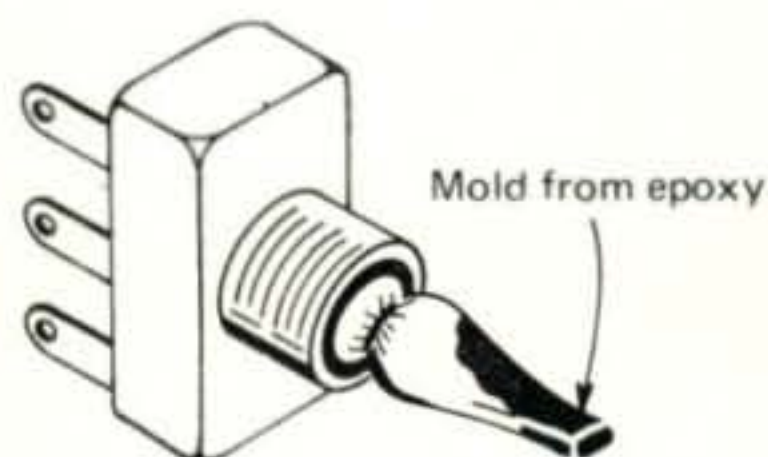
The missing half of a toggle switch handle can be molded from epoxy.
